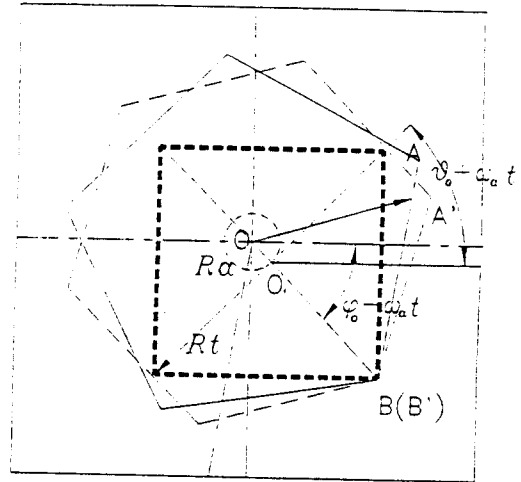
Generation of Workpiece Lobe for the Rotation of Tool
